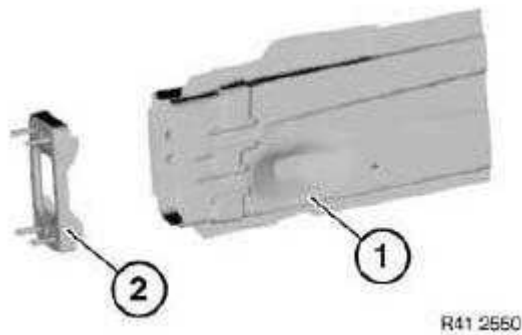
Engine Carrier, Front And Mounting, Cross-Member
